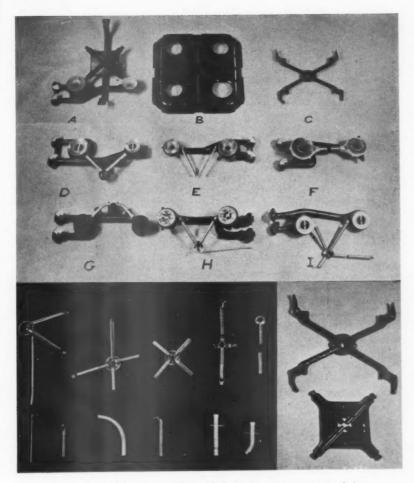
Typical burner assemblies with flash tubes of contemporary design
